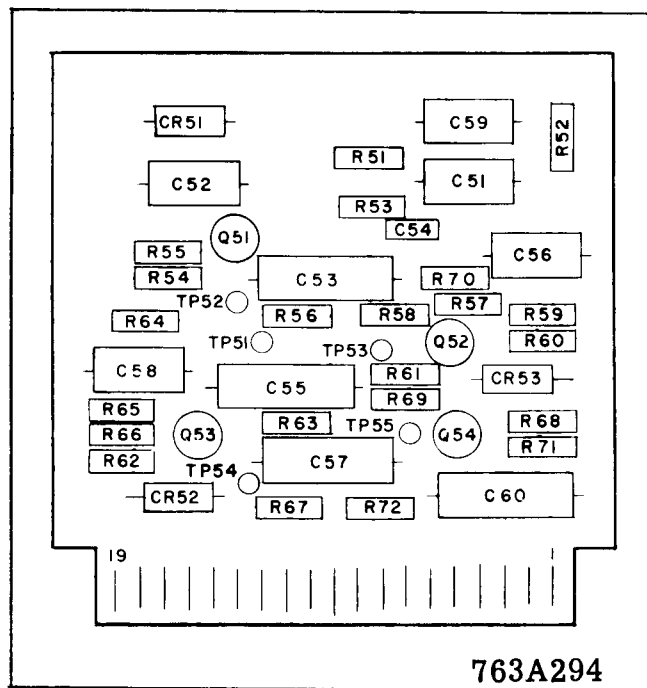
Component Locations on the Amplifier and Limiter Printed Circuit Board.
